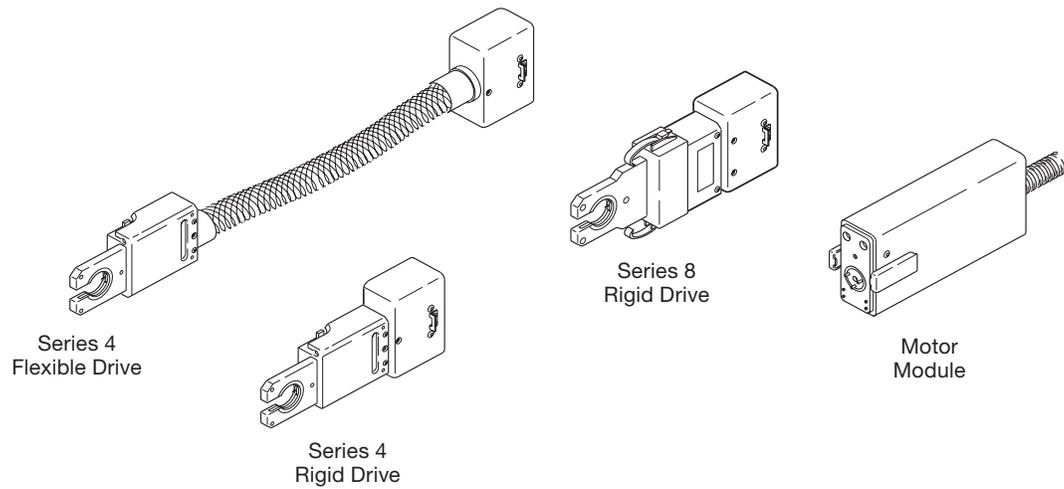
Rigid-Drive and Flexible-Drive Micro Weld Heads
